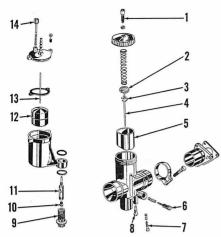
Exploded view of Puch carburetor used on 250cc models.
